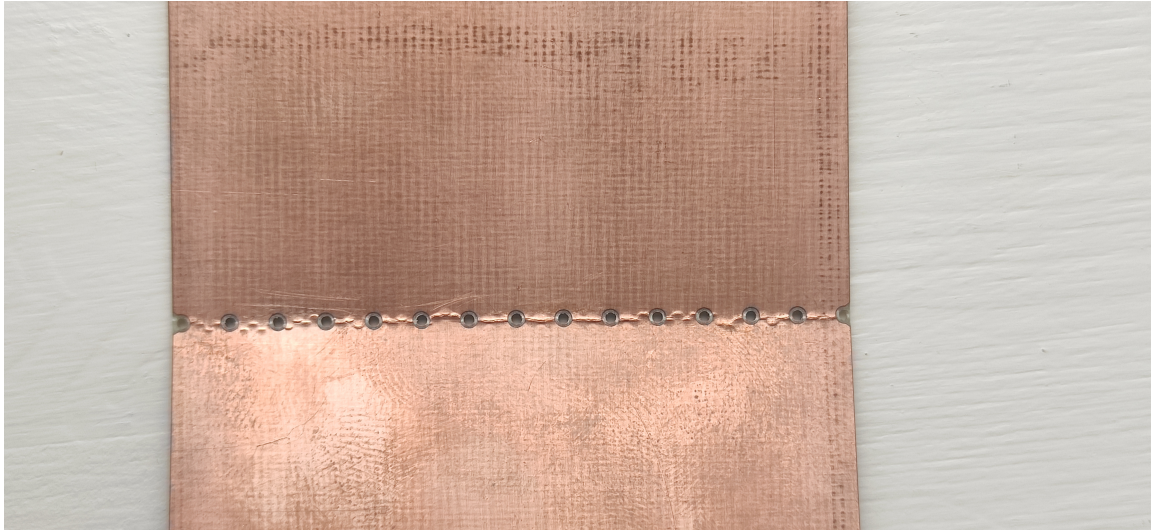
Top side of the mechanical test specimen "Eco1" after the three-point-bending test.
